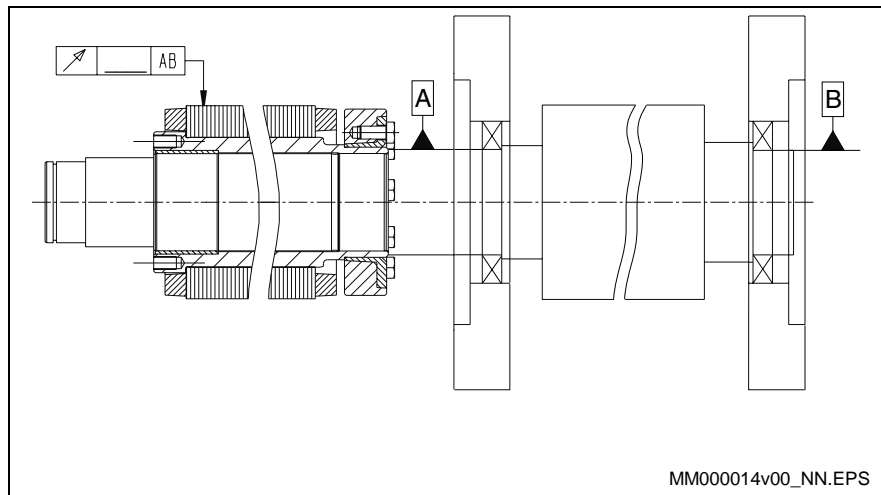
Checking the concentricity tolerance of the mounted rotor
